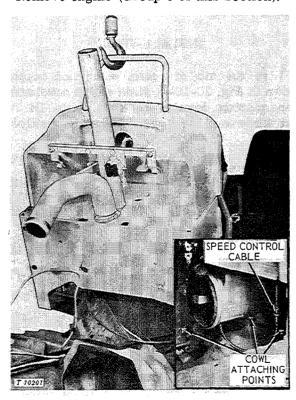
Removing Cowl Support (Tractors Without Loader)
